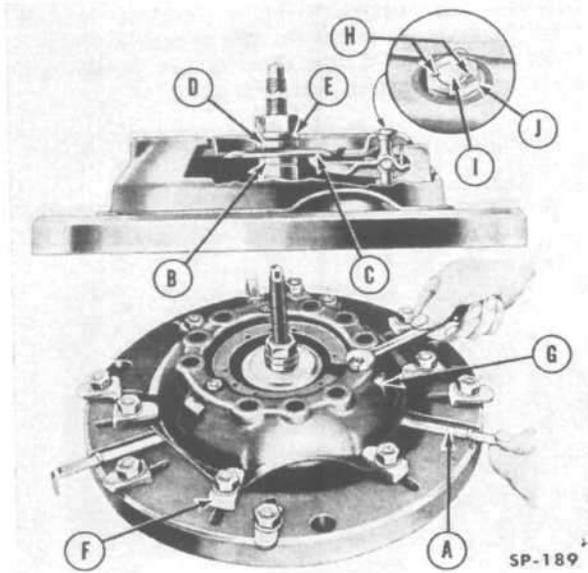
ADJUSTING PRESSURE PLATE LEVERS
